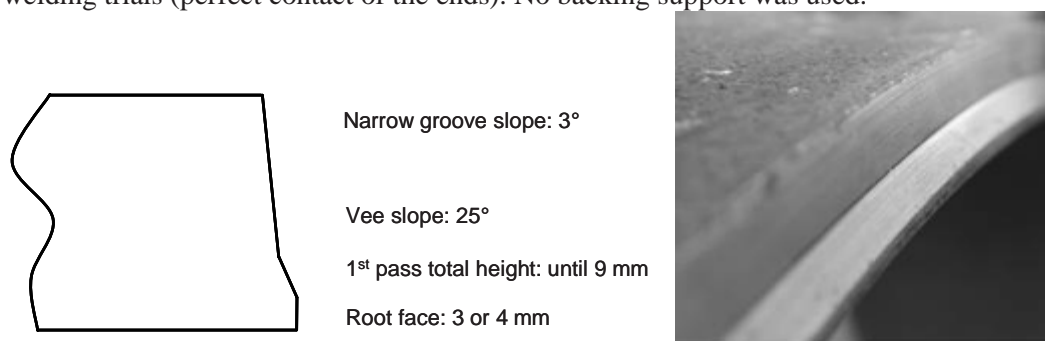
Joint preparation for root Laser – GMAW of X70 pipes 14.2 mm thick (left) and appearance of the bevel preparation machined (right).
